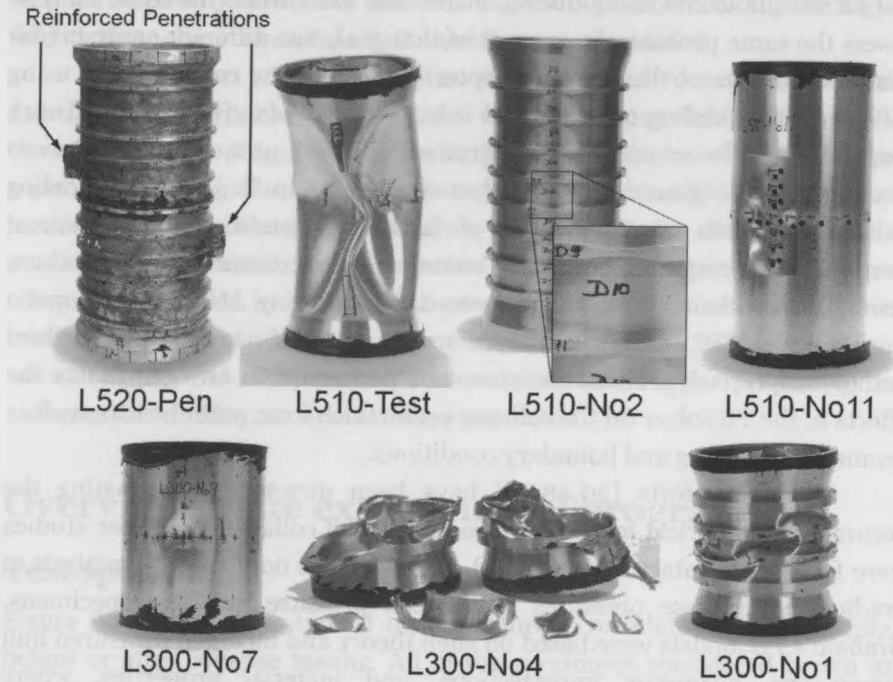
Typical test specimens, before and after collapse testing. Clockwise from top-left: L520-Pen, before testing, with rectangular-section stiffeners and two reinforced penetrations; L510-Test, the unstiffened cylinder after volume-control testing; L510-No2, before testing, showing dog-bone stiffener corrosion at inset; L510-No11, an internally-stiffened cylinder with a large patch of corrosion thinning, after volume-control testing; L300-No1, a short intact cylinder failing by interframe collapse, after volume-control testing; L300-No4, a short cylinder with heavy stiffeners and a small patch of shell corrosion, showing the specimen after conventional pressure testing; L300-No7, a short cylinder with light, internal stiffeners and a small patch of corrosion thinning that failed by overall collapse, shown after volume-control testing.
